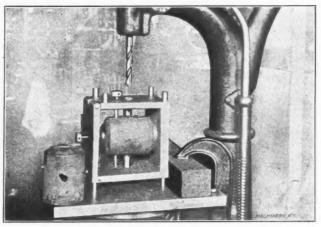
Jig for Drilling the Wrist-pin Hole in the Piston
